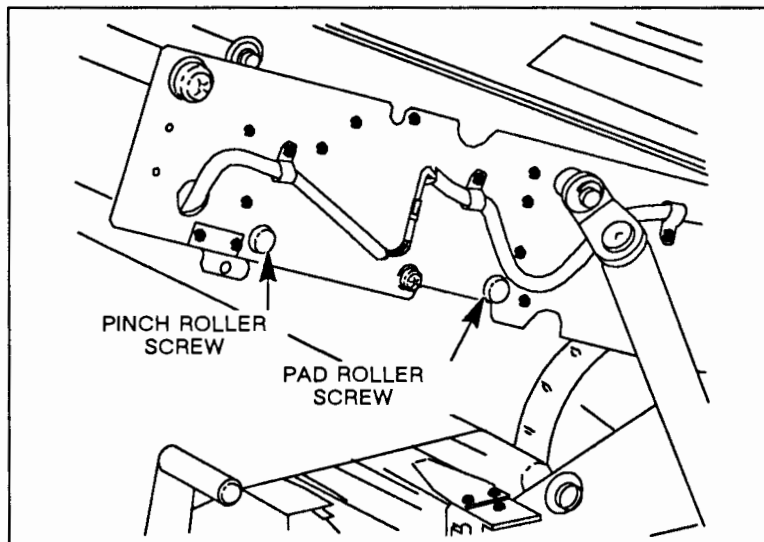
Pinch Roller and Pad Roller Restraining Screws (Right Side)
